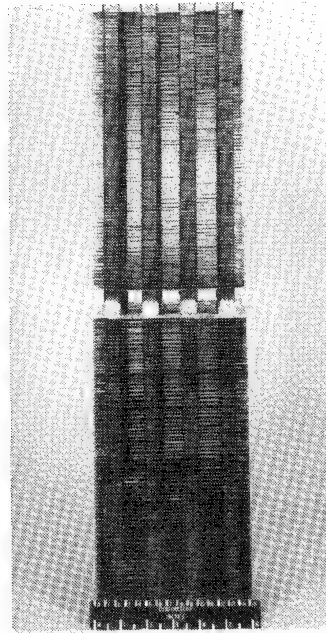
Braze test specimen showing fin-tube and tube to tube joints.
